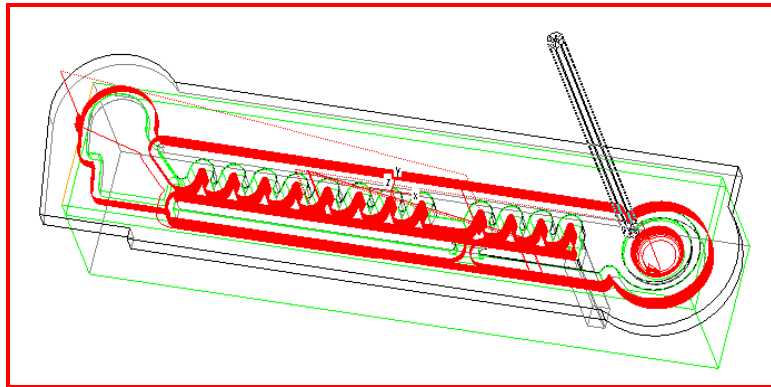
The trajectory of the cutting tool for finish machining of the workpiece.
